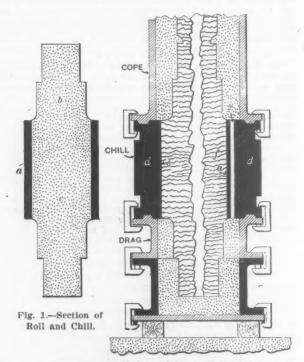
Section of Roll Mold, Showing Crust Formation Soon After Pouring.
